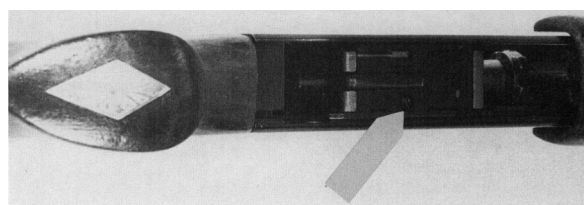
Bridge screw holding bridge to bolt carrier.
